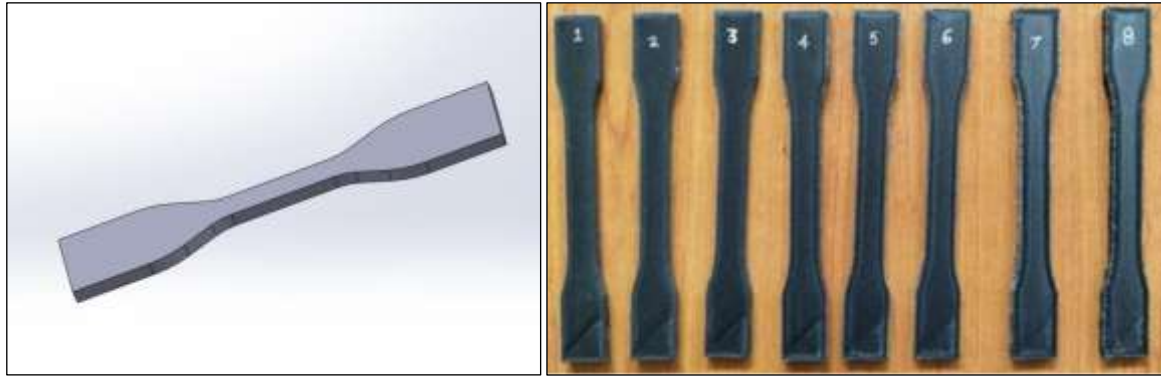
Tensile Strength testing Samples as per ASTM D638 Standard.
